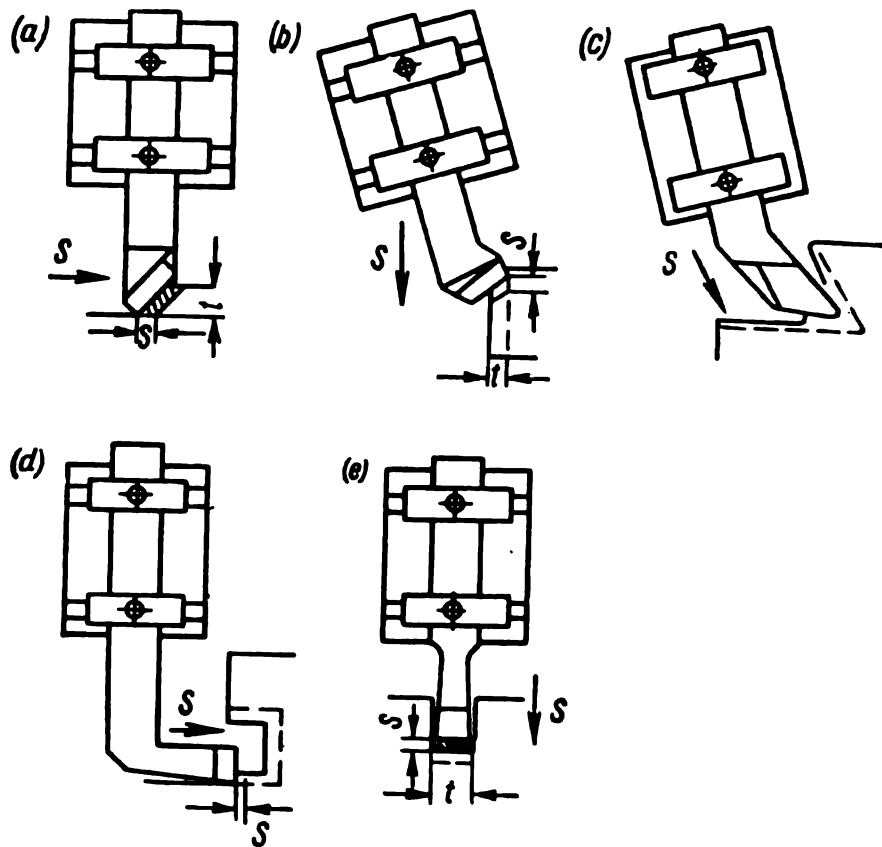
Main types of flat surfaces, slots, recesses, and grooves machined by planing or shaping
